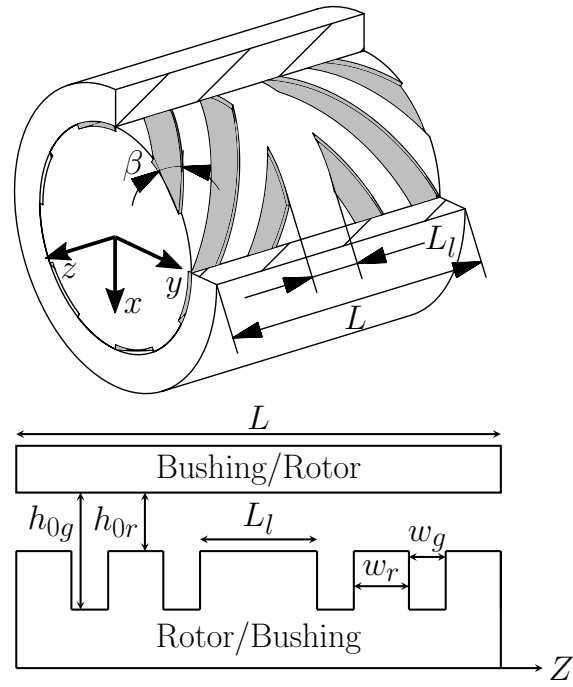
Herringbone grooved journal. Bearing design parameters.
